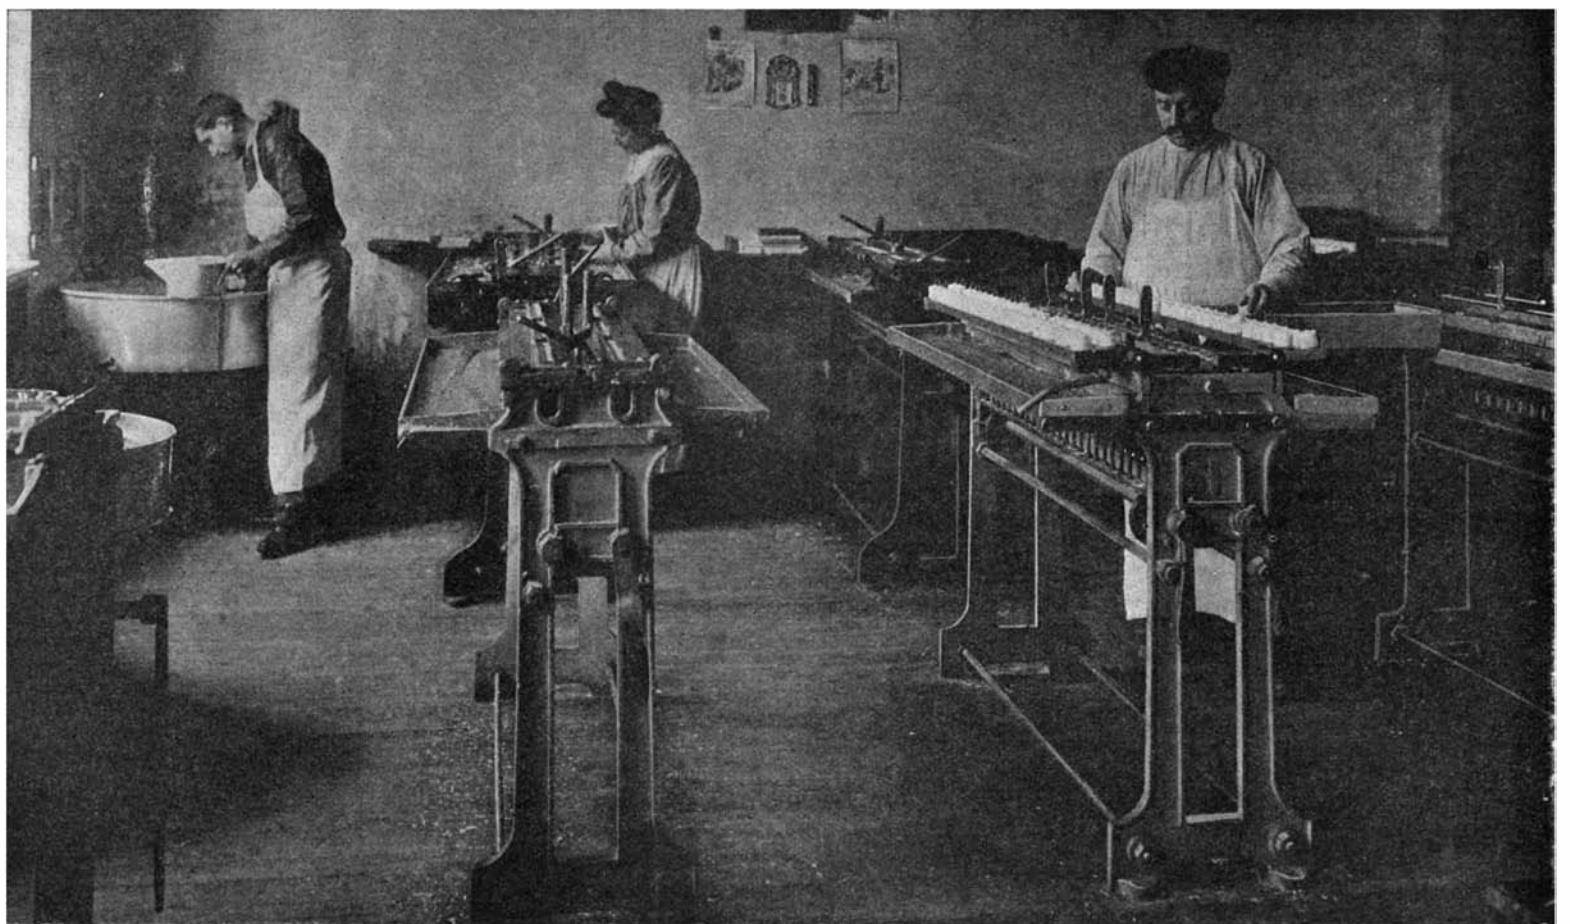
Molding "Carrière Veilleuses" or Night Lights.
